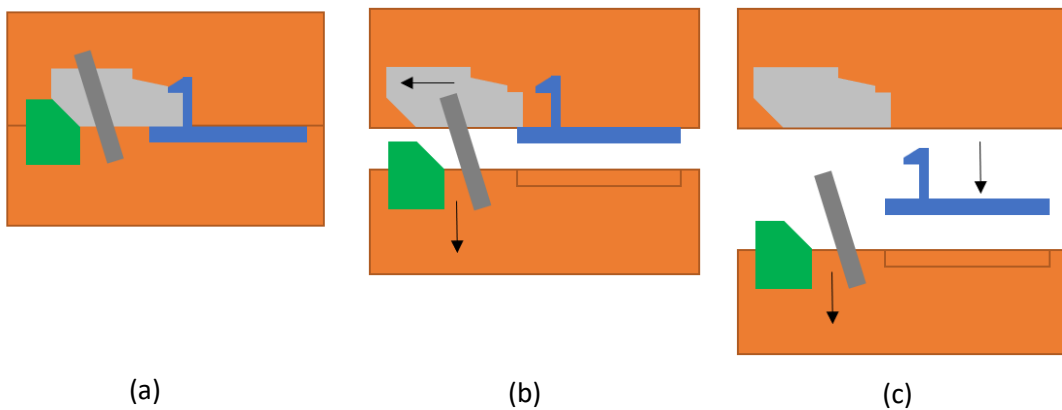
Slider movement illustration a) Injection step b) mould opening c) extraction.
